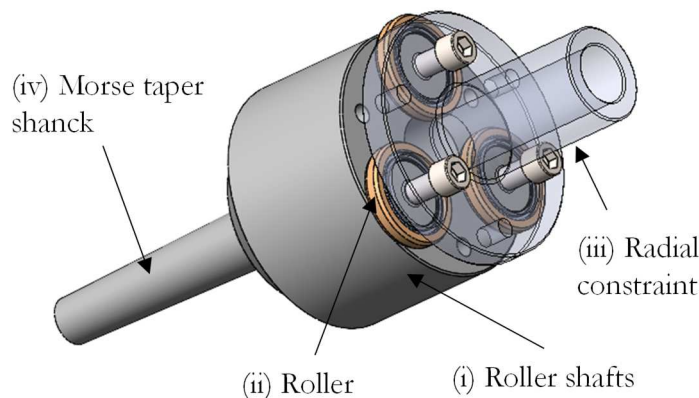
Translational part: (i) Roller shafts; (ii) Rollers; (iii) Radial constraint; (iv) Morse taper shank.
